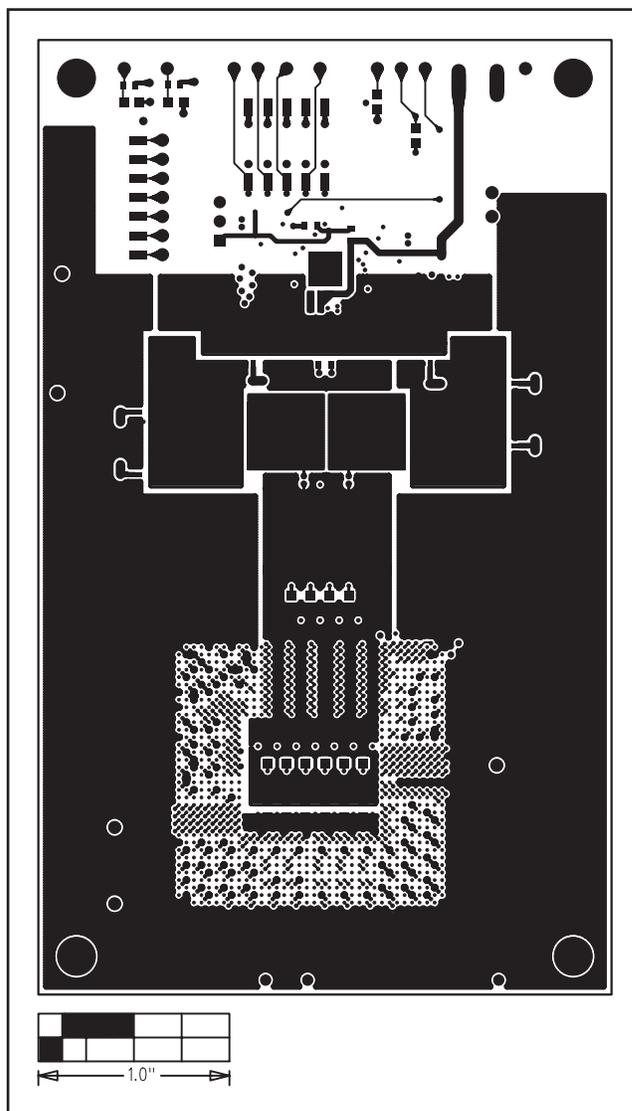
MAX17582 EV Kit PCB Layout—Component Side
